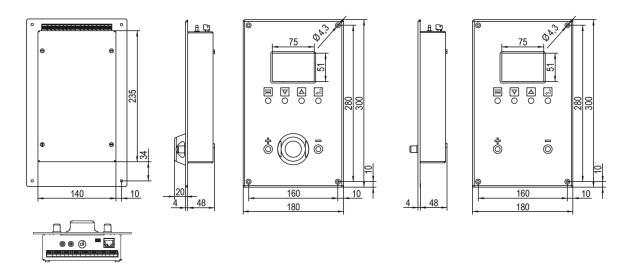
CRP5 dimensional drawings with HC2-CRP front panel probe (left) and E2 connection for external HC2 probe (right)
